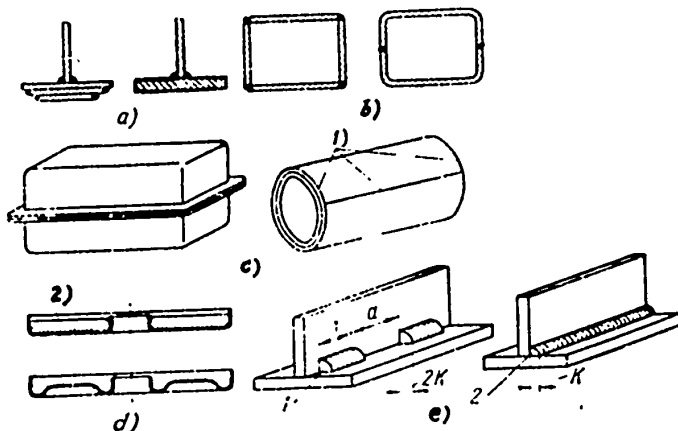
Method of Reducing the Amount of Welding Work
